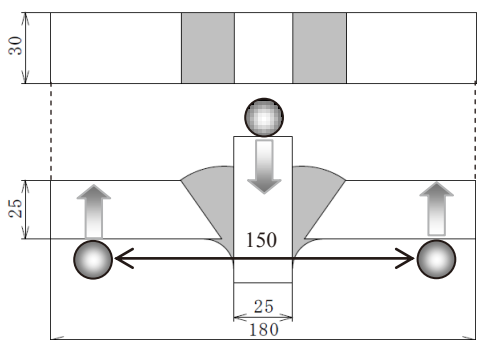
Schematic diagram of fatigue test for cruciform weld joint
